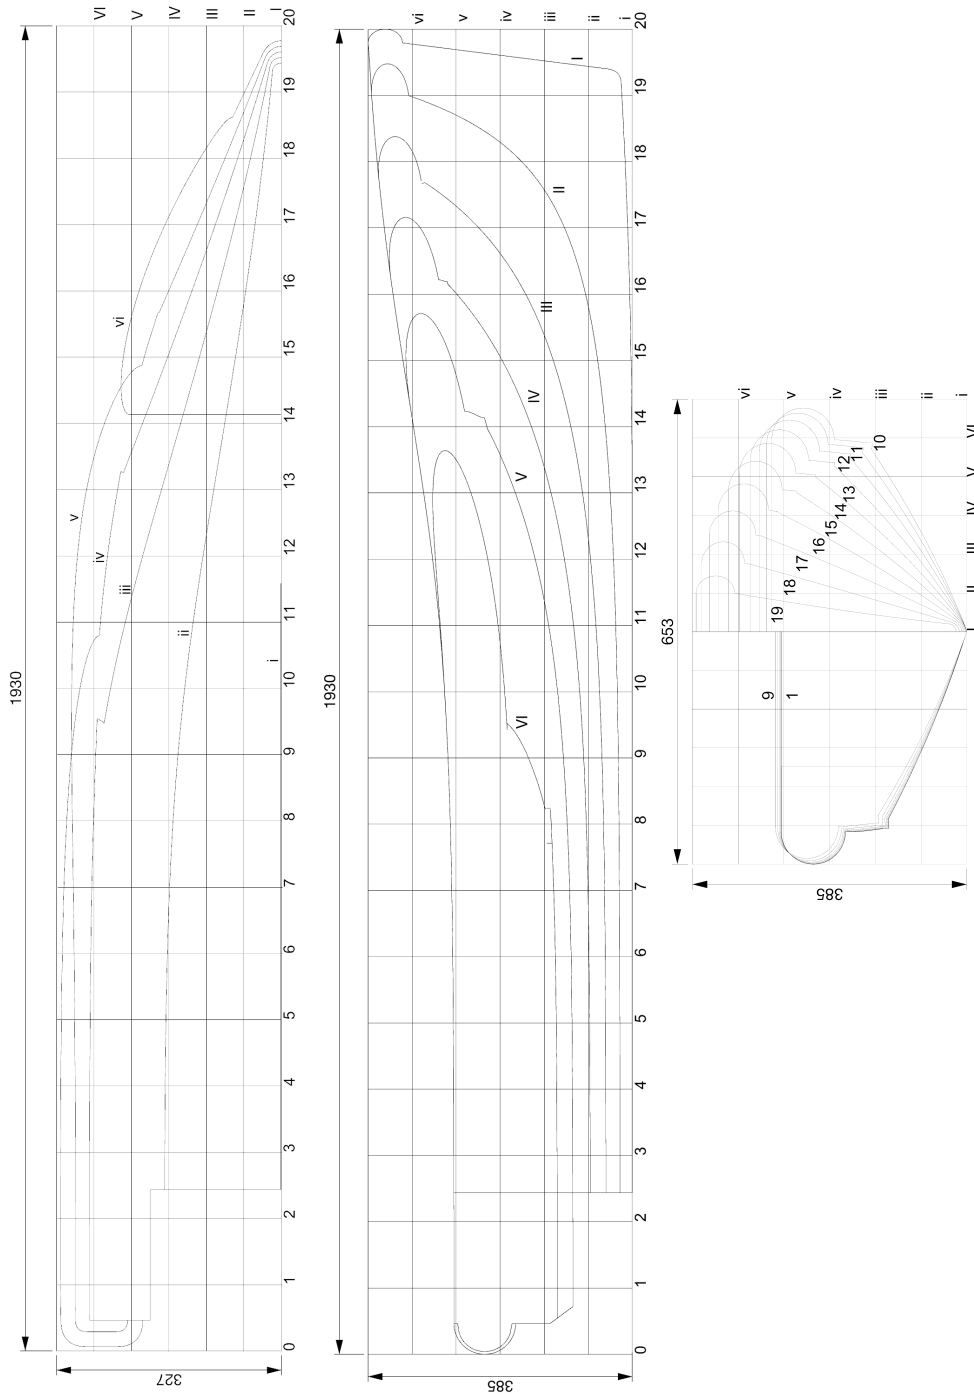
Lines plan RIB with dimensions in [mm].
